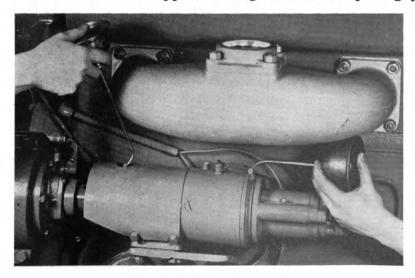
Lubricating Generator Drive Assembly (grease lubricated type only)
